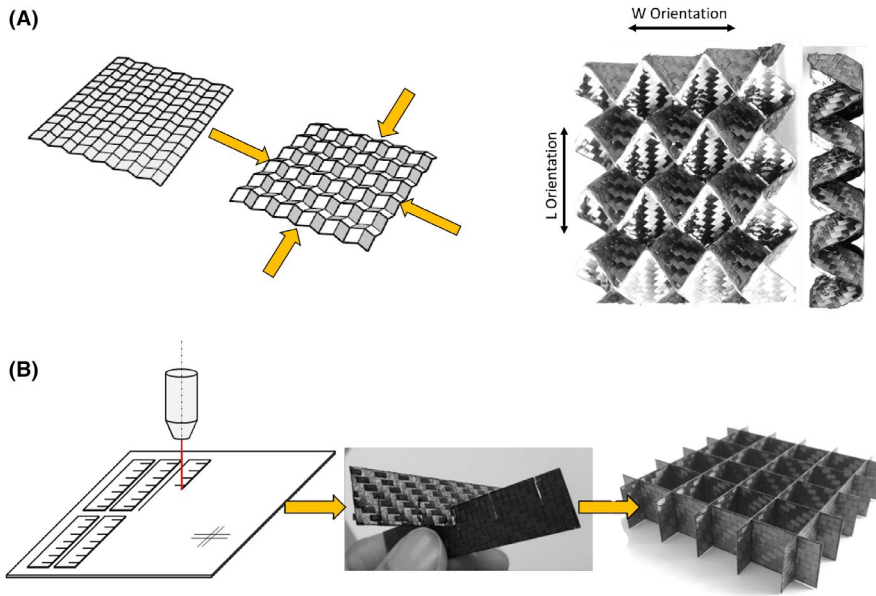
Manufacture of a fold-core (A) by folding of a prepreg layer and a grid-core (B) by laser cutting of slit strips out of C/C plates and assembly of the strips to a grid-core
